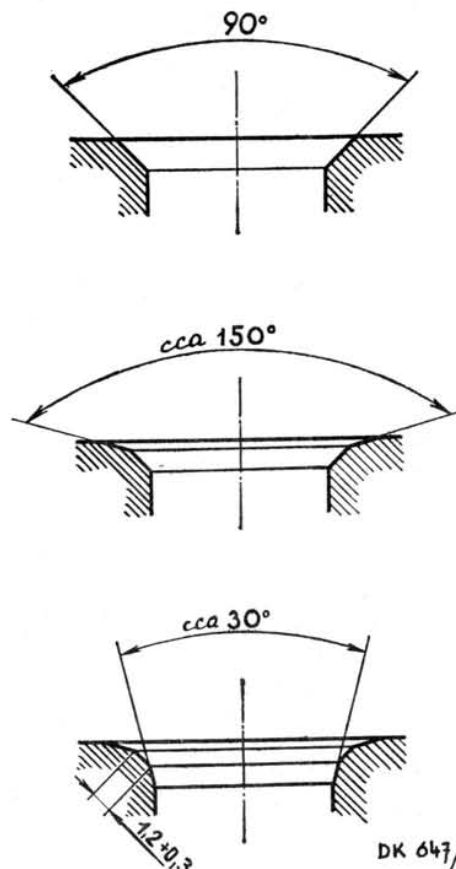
/6 - Reconditioning Valve Seat Using a Milling Cutter - Sequence of Operations
